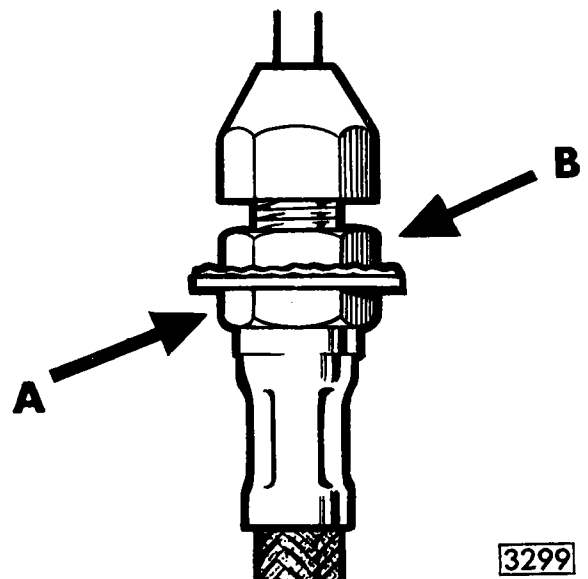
Flexible hose connection. Hold hexagon "A" with a spanner when removing or refitting locknut "B"
